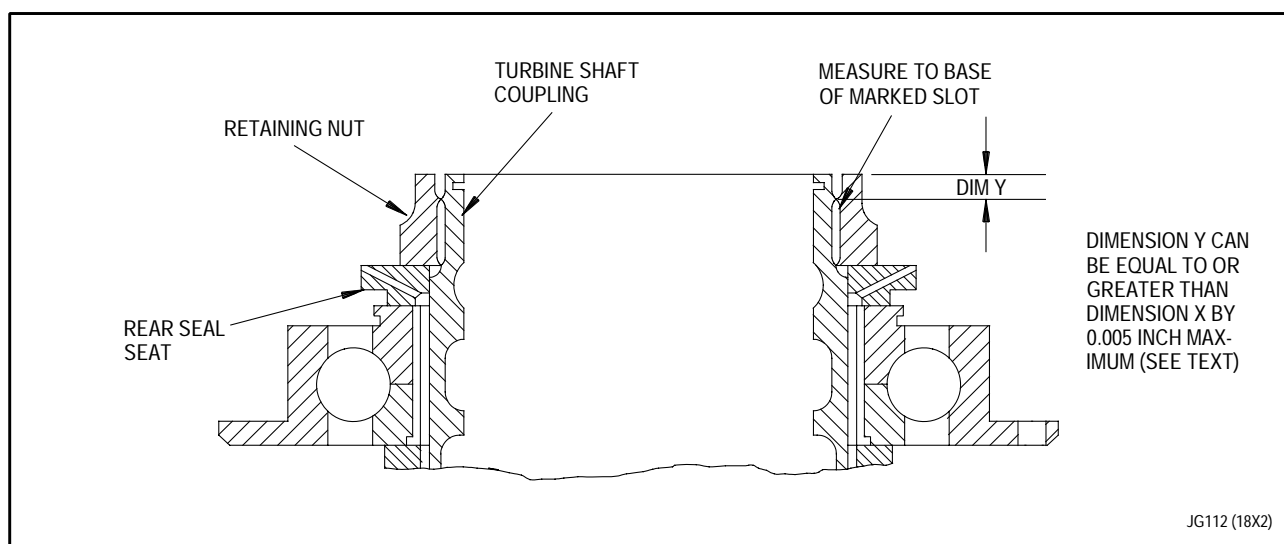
No. 2 Bearing and Coupling - Final Seating Measurement
